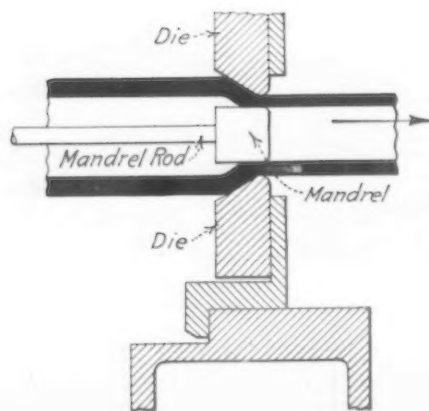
Illustrating position of tube in die of cold-draw bench. Tube is pulled in direction shown by arrow.
